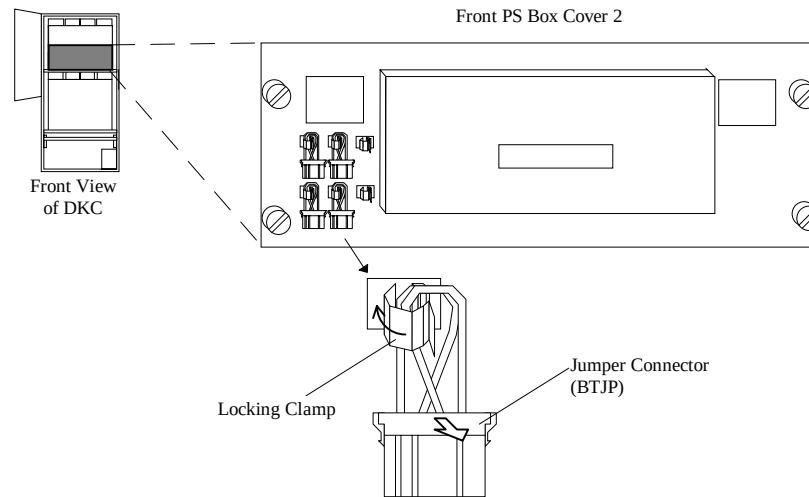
Removal of Jumper Connectors
